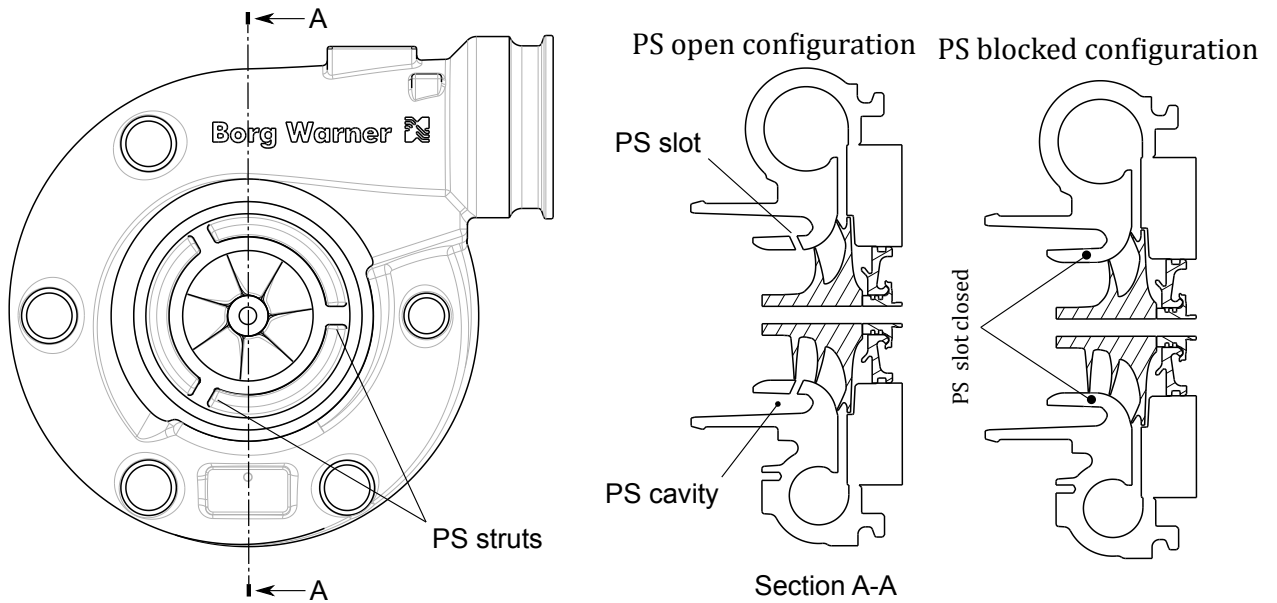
Drawing of the compressor along with sectional views of the open and blocked compressor configurations.
